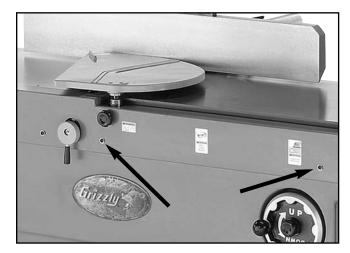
Hex bolts and flat washers used to secure the front eccentric cover to the jointer base.
